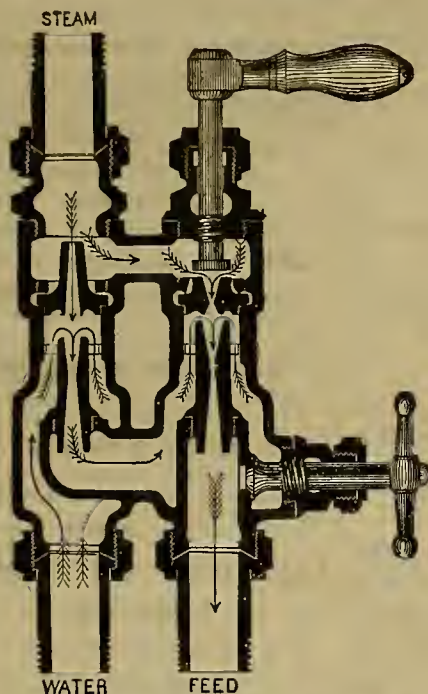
SECTION OF HANCOCK INSPIRATOR.
